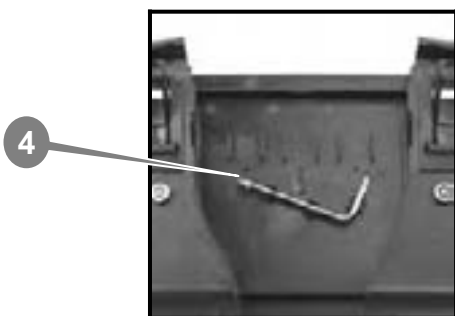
TORX screwdriver in the transmitter back panel
